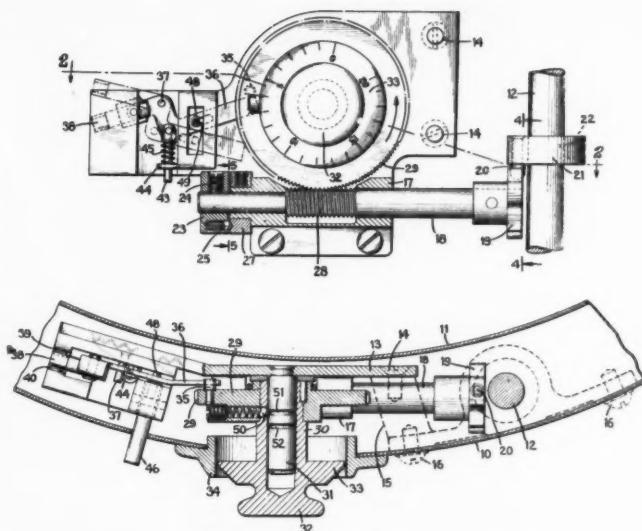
Gears and a toothed wheel are employed in an ingenious timing device for washing machines
